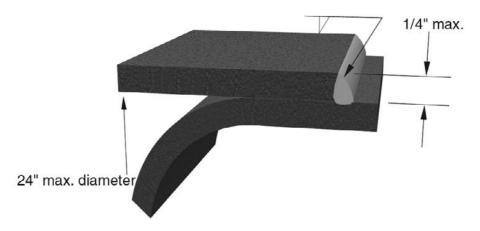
Alternative shell-to-head Type 6 weld joint.
